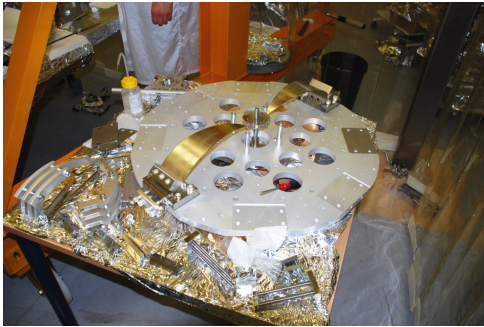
The blade, the bending profile, and the lower clamp are taken from the jig and mounted on the GAS-filter baseplate. Two blades are always opposing each other. The blade's tip is bolted to the keystone. It is held in place by a threaded rod from the bottom of the baseplate.
